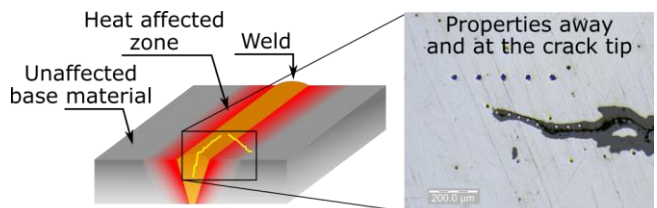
Indentations near and away from the weld crack tip.
